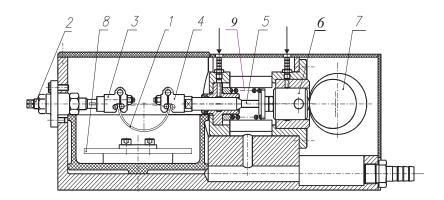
Design scheme of the SKMR-2 head unit; 1 - specimen, 2 - adjusting screw, 3 - specimen fixture (dynamometer), 4 - movable specimen fixture, 5 - pusher, 6 - roll follower, 7 - eccentric, 8 - heater, 9 - compression spring
